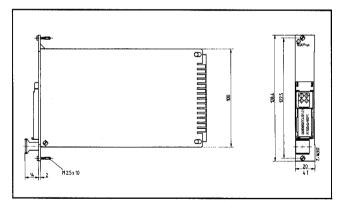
Dimensional drawing 19" plug-in card (dimensions in mm)
